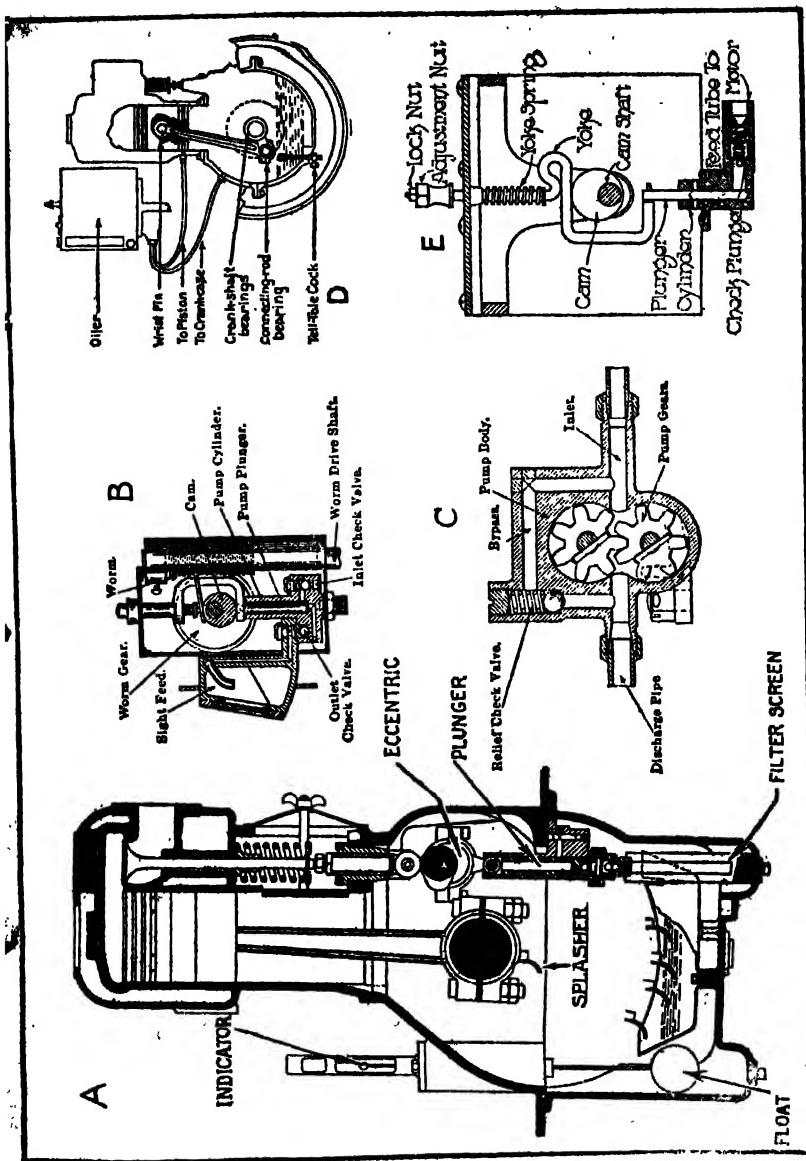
Various Forms of Oil Pumps Used to Circulate Lubricating Oil.
